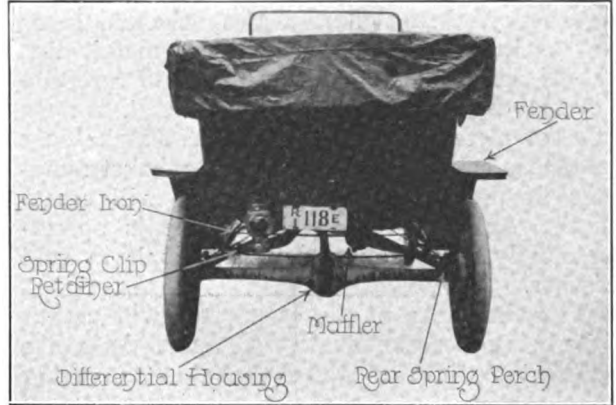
Components of Rear Construction Which Should Not Be Overlooked in the Overhaul.
